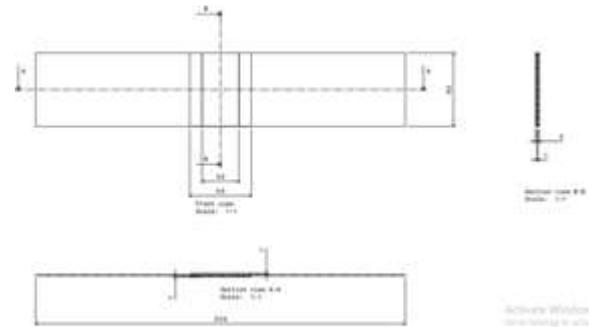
Drafting view of aluminum sheet plate with crack & patch
